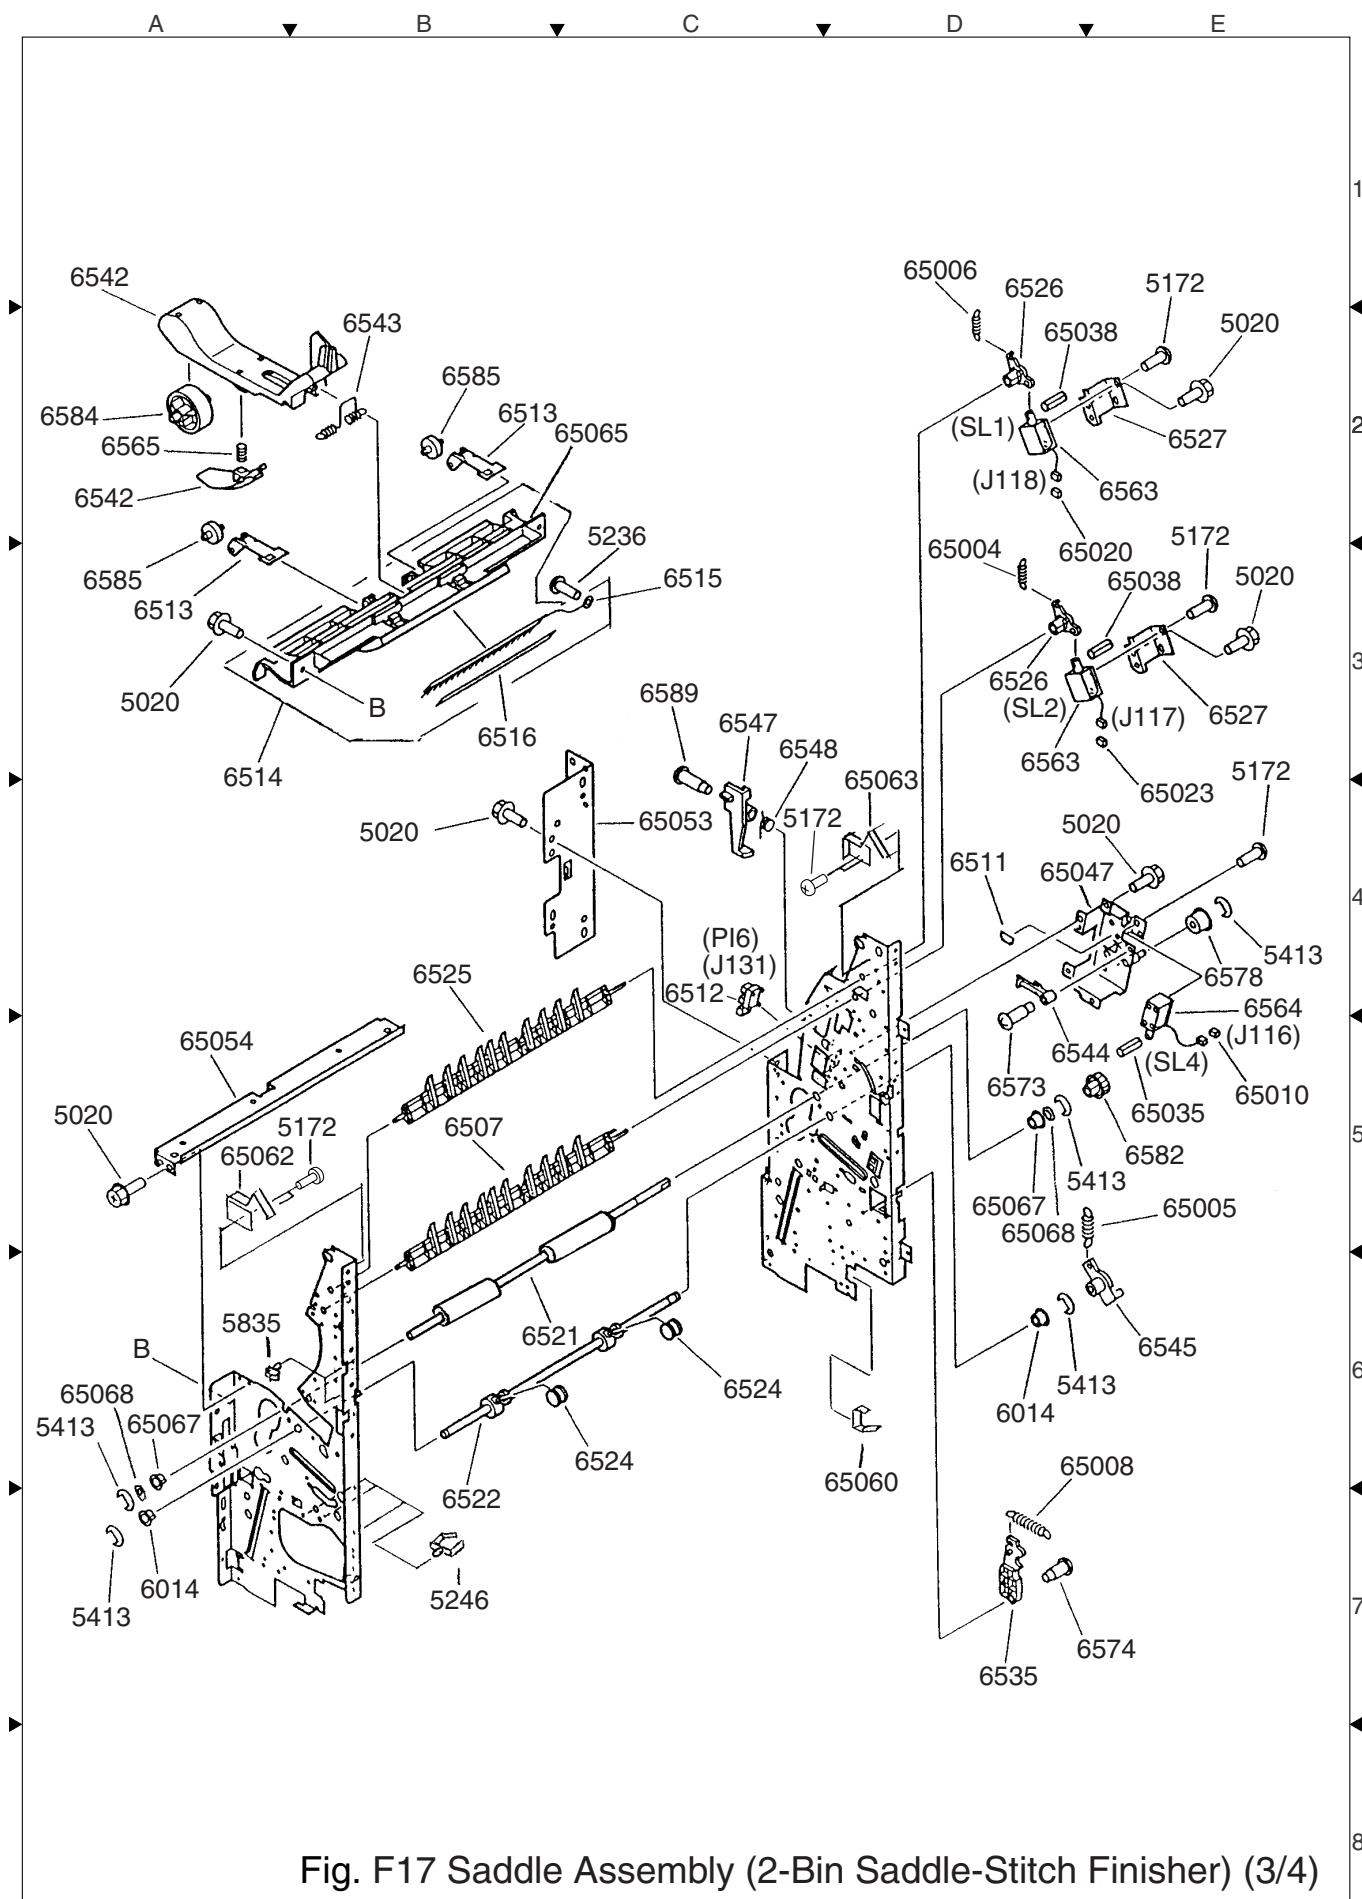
Saddle Assembly (2-Bin Saddle-Stitch Finisher) (3/4)
